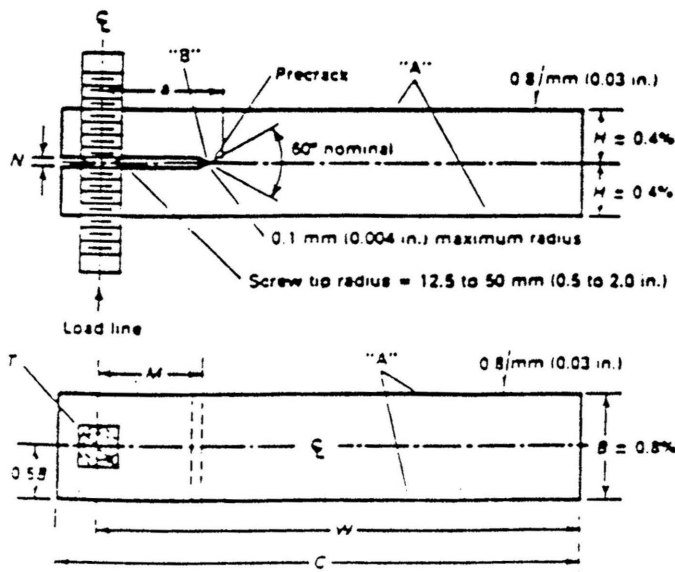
DIMENSIONS OF FRACTURE TOUGHNESS SPECIMENS
